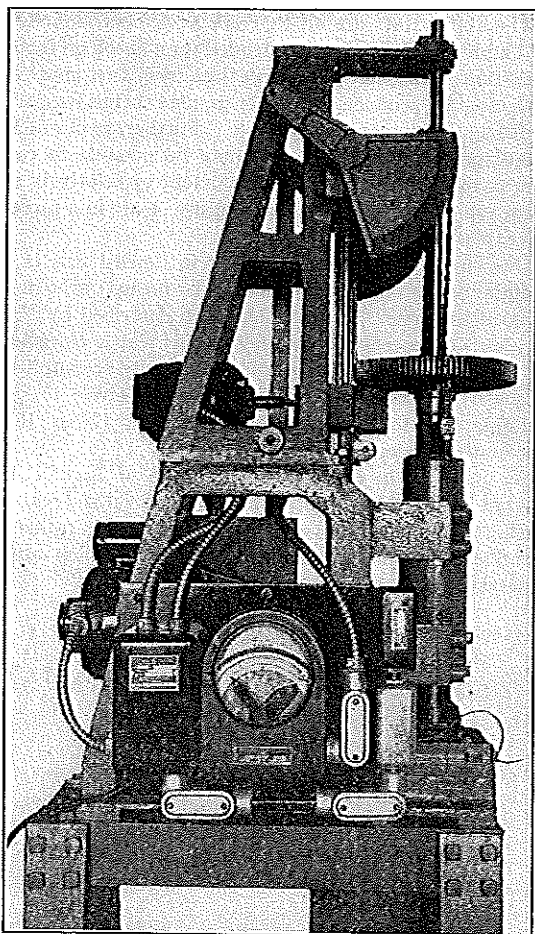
Preston automatic single-head sustained pressure-testing machine.
